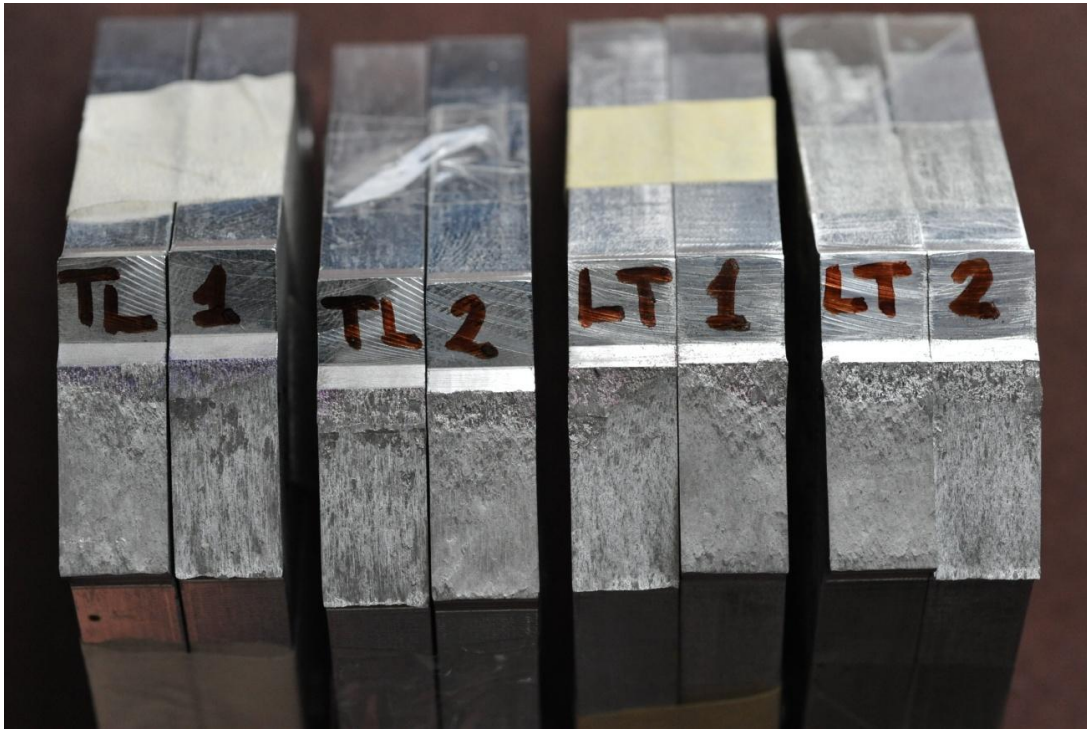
20 Fracture surfaces of mode II fracture toughness specimens.
